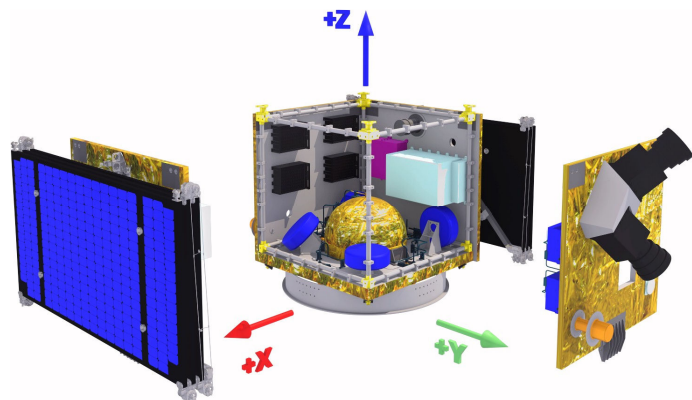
PMM Module. This figure shows exploded views of the Multi-Mission Platform.
